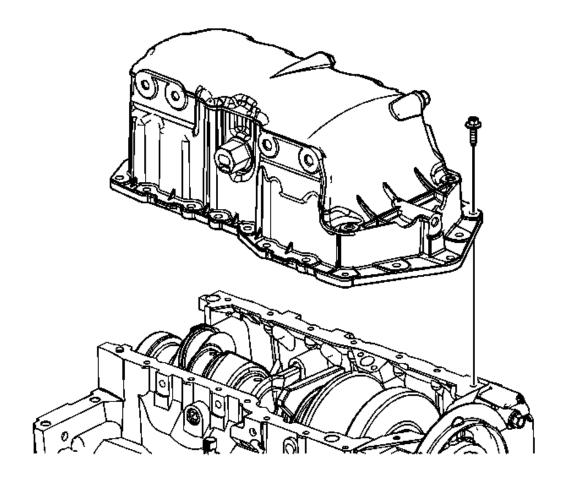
View Of Oil Pan & Bolts Courtesy of GENERAL MOTORS CORP.
